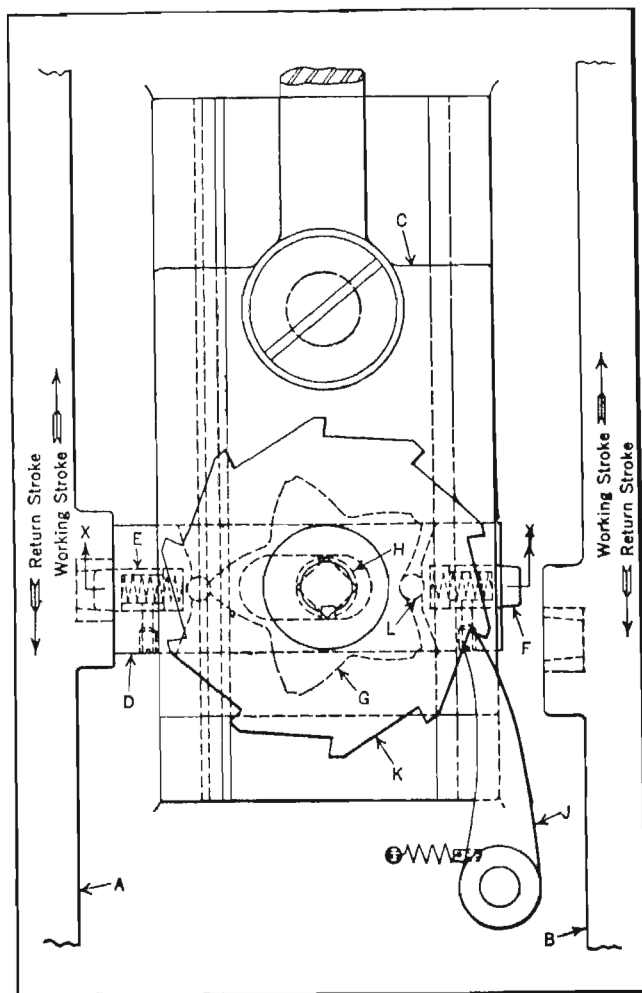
Combination Ratchet and Cam Mechanism for Alternately Locking Two Parallel Slides to a Continuously Reciprocating Cross-head.
